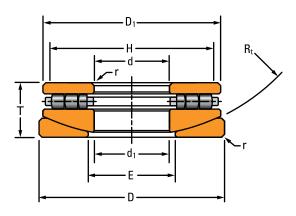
Type TPS thrust cylindrical roller bearing assembly.
